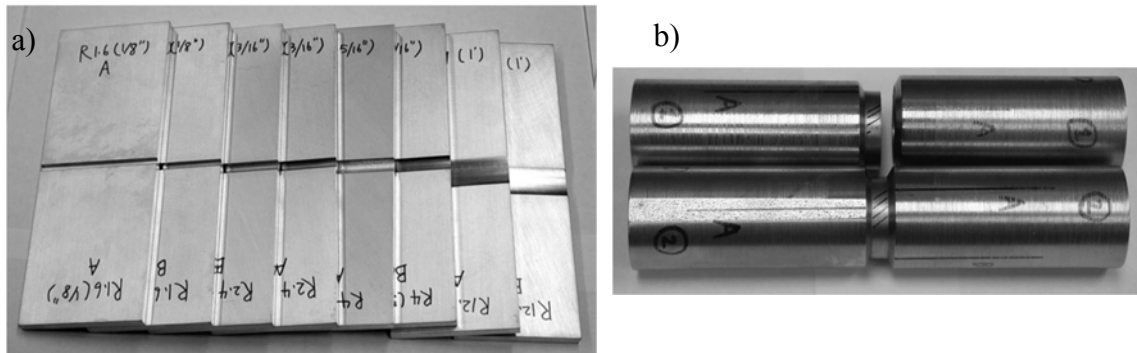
Flat grooved specimens a) and specimens for pure torsion b) of 1045 steel [29].
